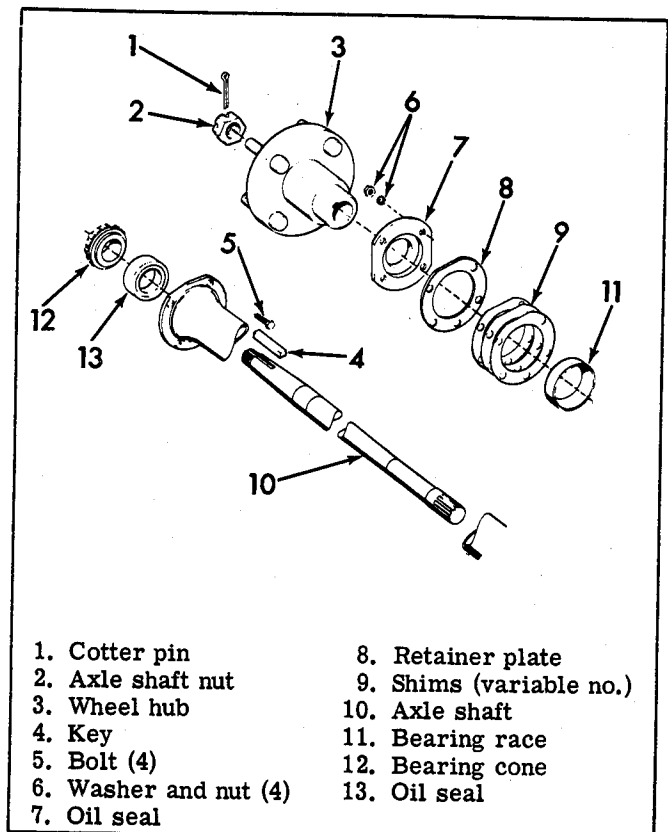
Rear Axle - Exploded View - 1963-1975 Models DE, DE-4, DEF and DEC
